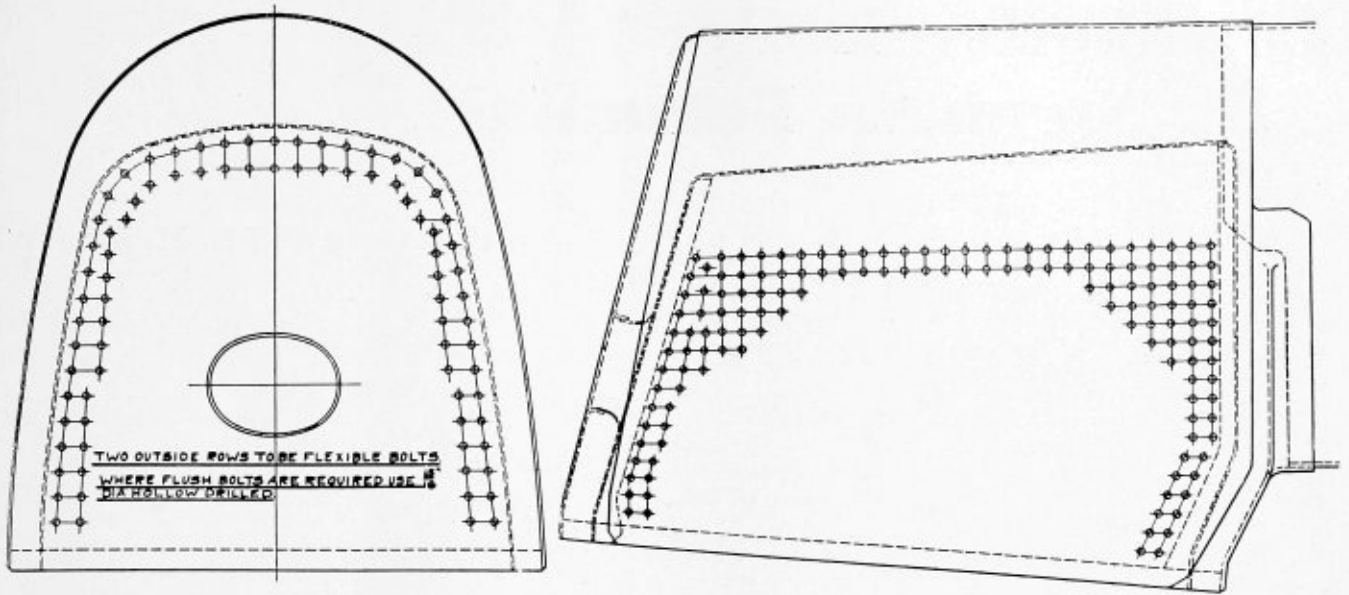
(Above) Flexible staybolt application in breaking zone of backhead, and in breaking zone of side sheets. Fig. 10.—(Right) Low water alarm and its parts
